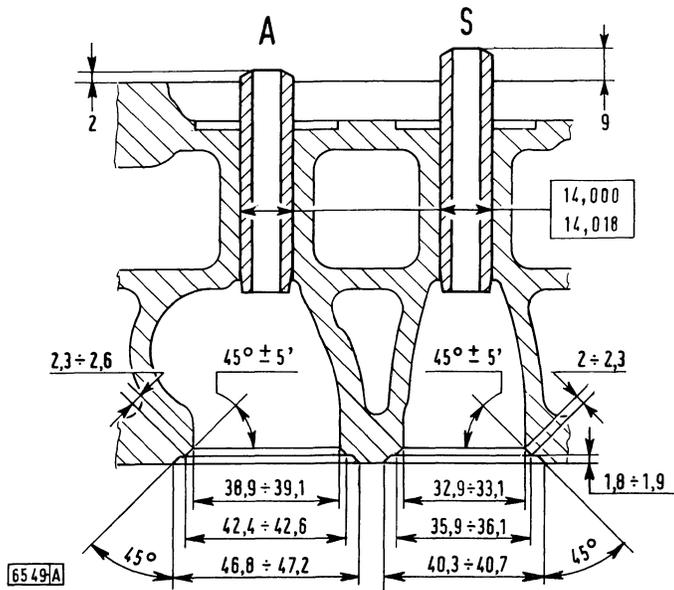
Valve Seat, Valve Guide Housing Bore and Valve Guide Protrusion Data
